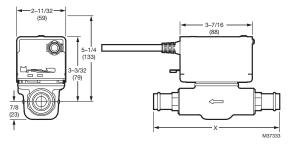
Dimensions (V8043A, V8043E). Measurements in inches (mm). See Table 1.
